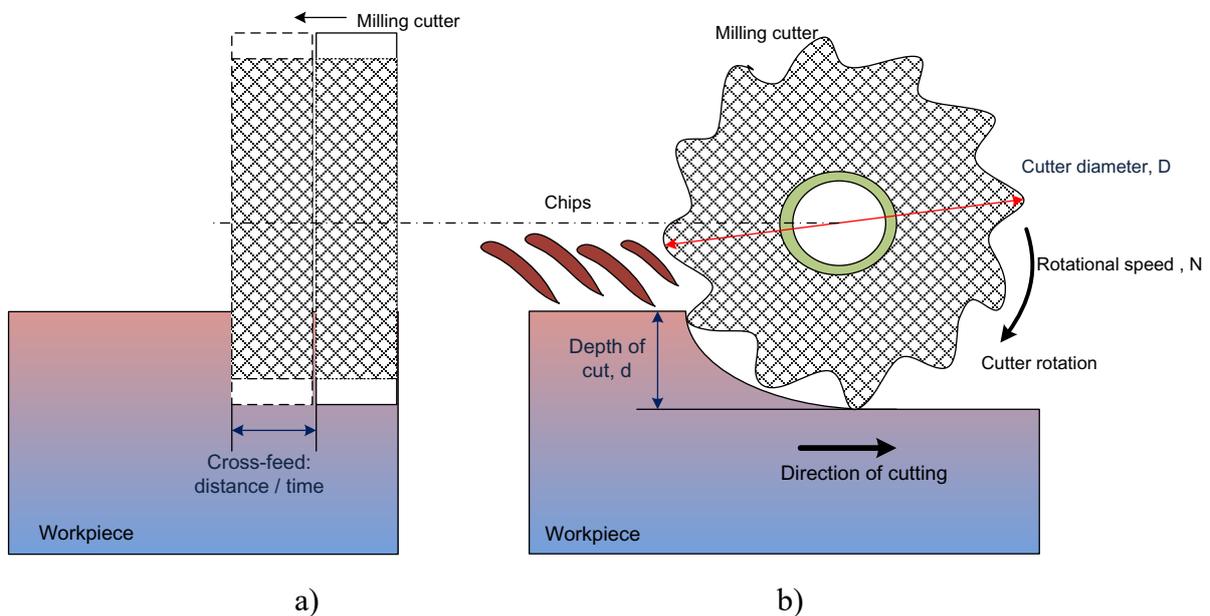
Schematic diagram showing peripheral milling and cutting parameters a) side and b) front view of tool and workpiece interaction.
